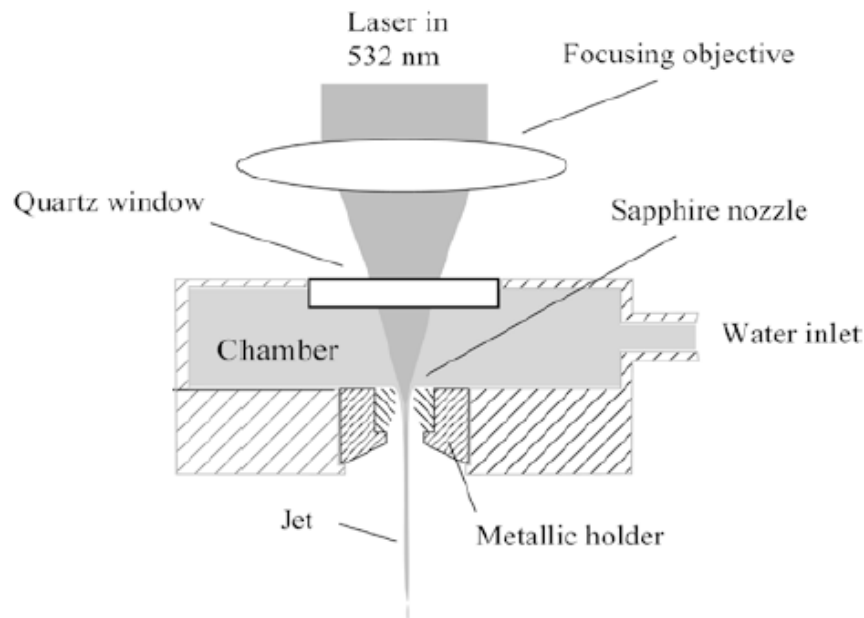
Cross-sectional view of the coupling head geometry for the laser micro-jet [1.27].
